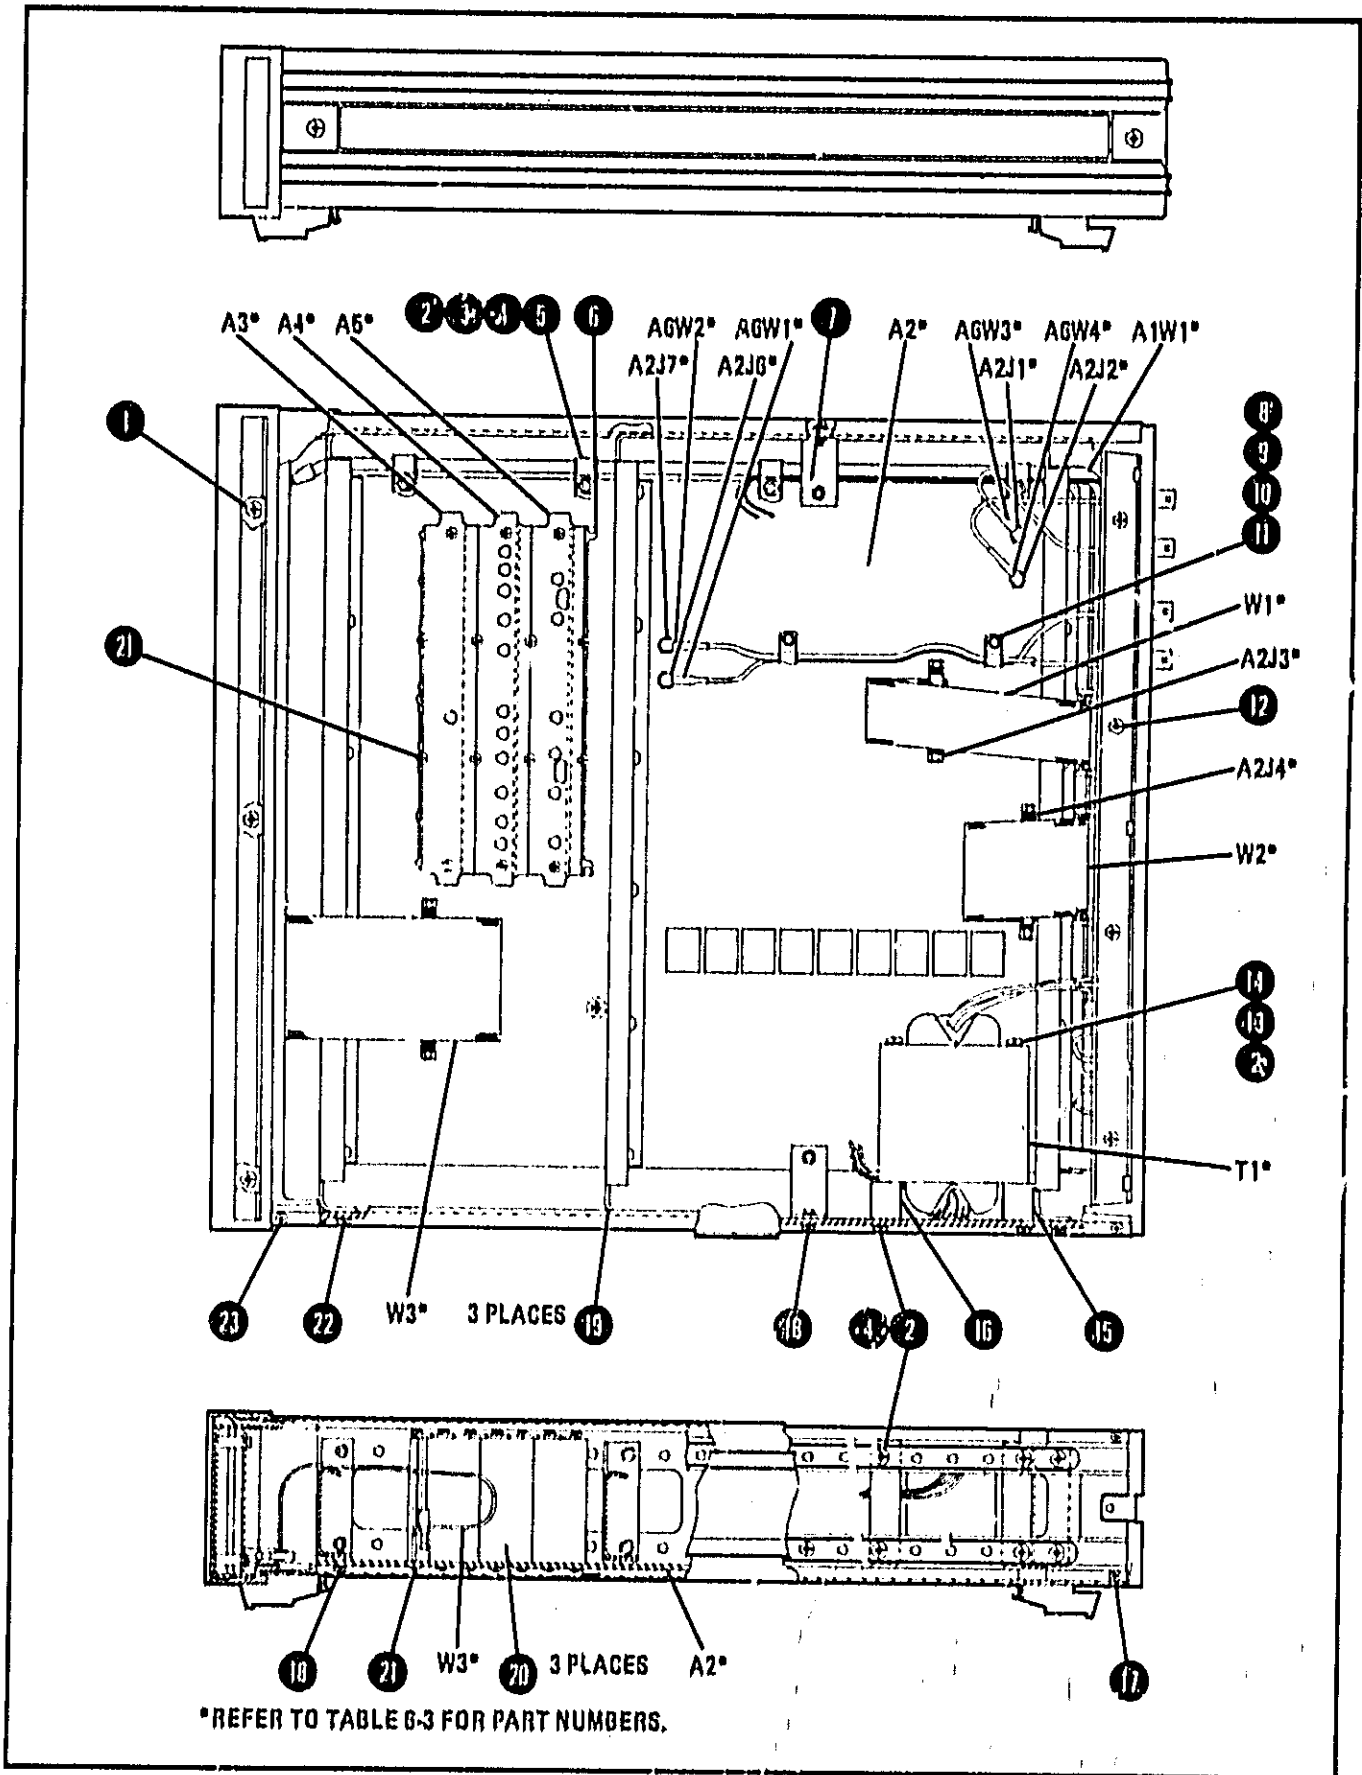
Chassis Parts, Exploded View (1 of 2)
